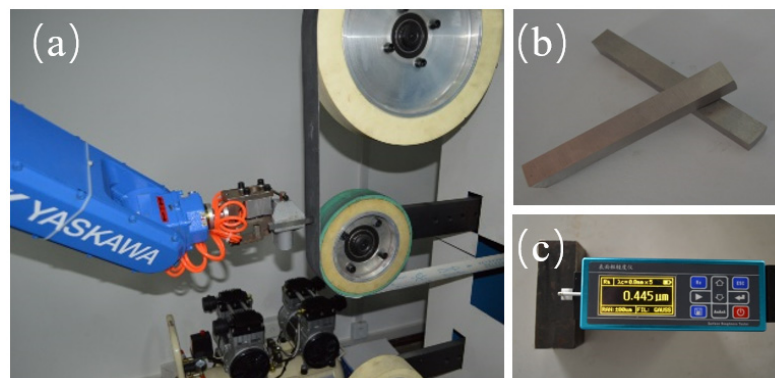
(a) Grinding experiment; (b) Workpiece of 45 steel; (c) TR210 roughness tester.
